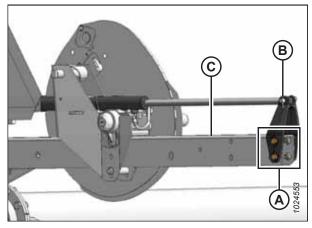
Right Reel Arm Cylinder in Forward Position
